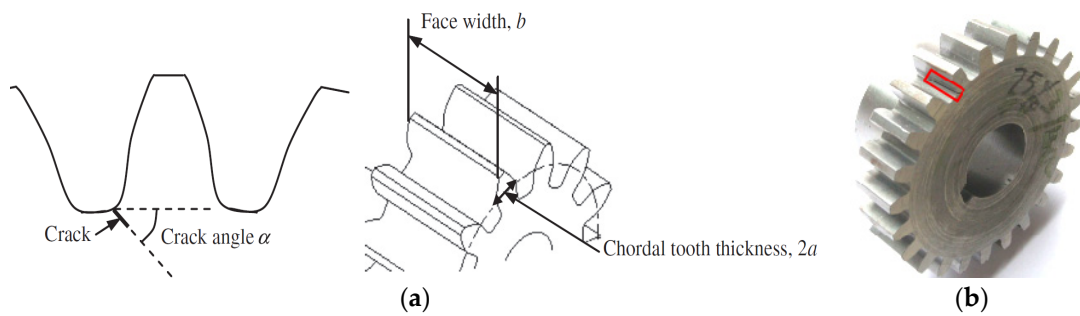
Gear crack angle, face width and chordal tooth thickness and experiment fault gear. (a) Crack angle, face width and chordal tooth thickness of a gear; (b) 75% level crack in the gear.
